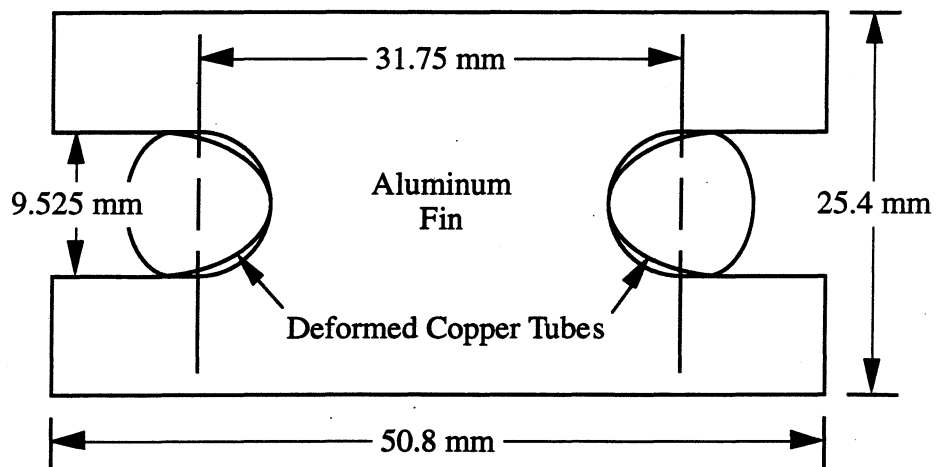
Typical Rectangular, Plate-Fin Cross Section
